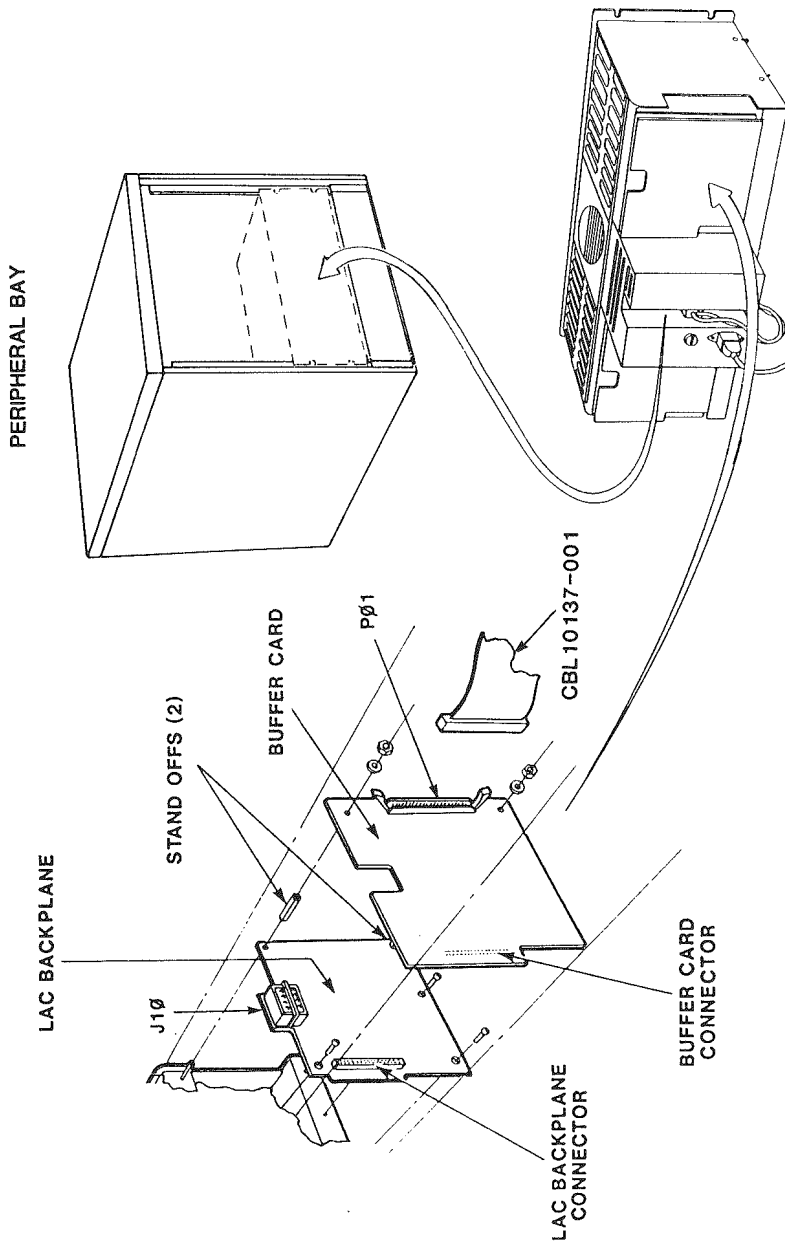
ICS3 BUFFER CARD/LAC BACKPLANE REMOVAL
